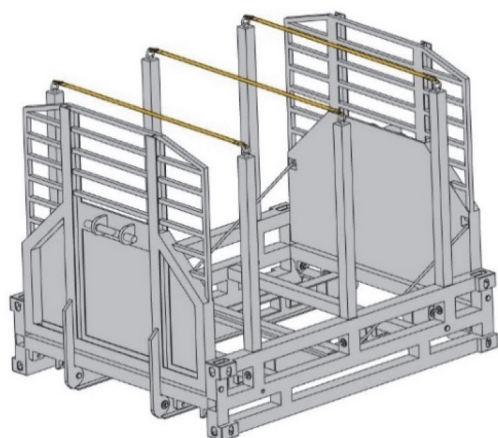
Complete single platform-container module in the configuration with two end carriages mounted vertically and fixed with lateral braces and comb bottom joints
